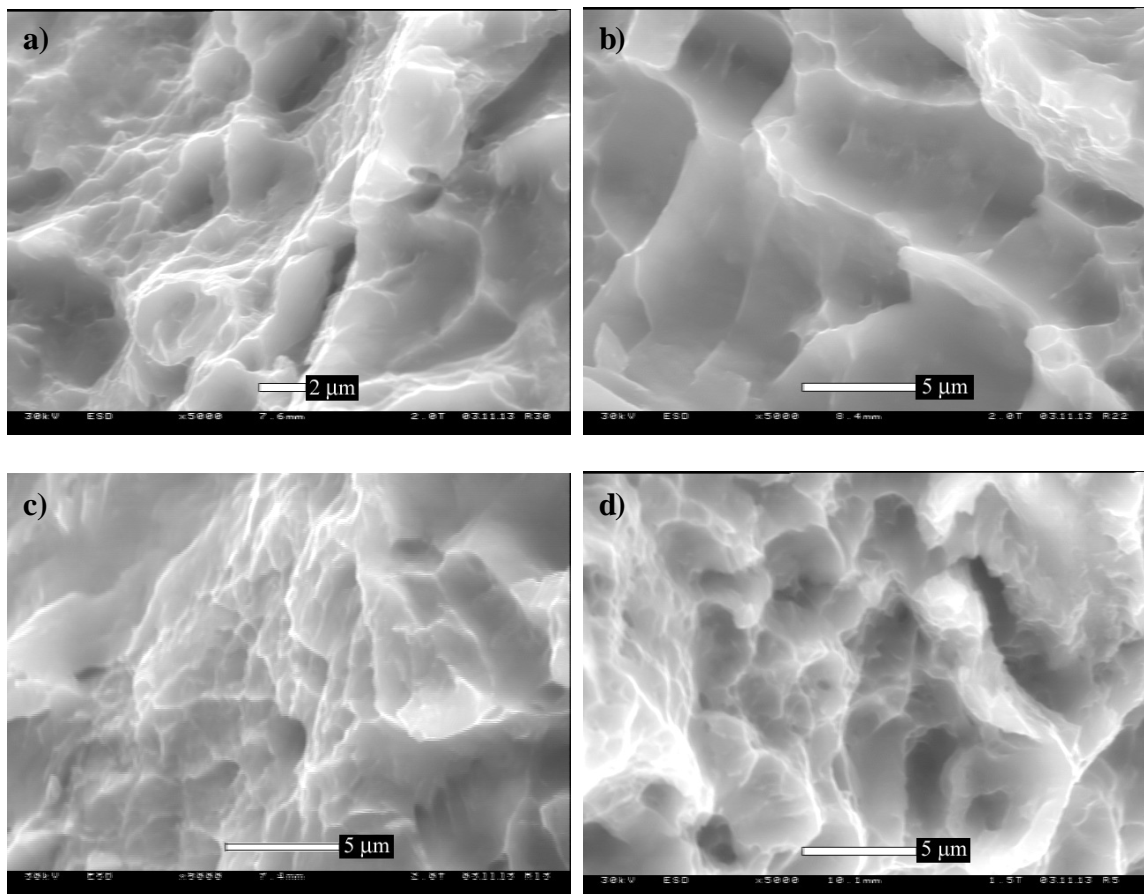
Fracture surfaces of tensile specimens, 5000x. (a) Base metal, (b) matching filler metal weld, (c) modified 50 ppm Y filler metal weld, and (d) modified 200 ppm Y metal.
